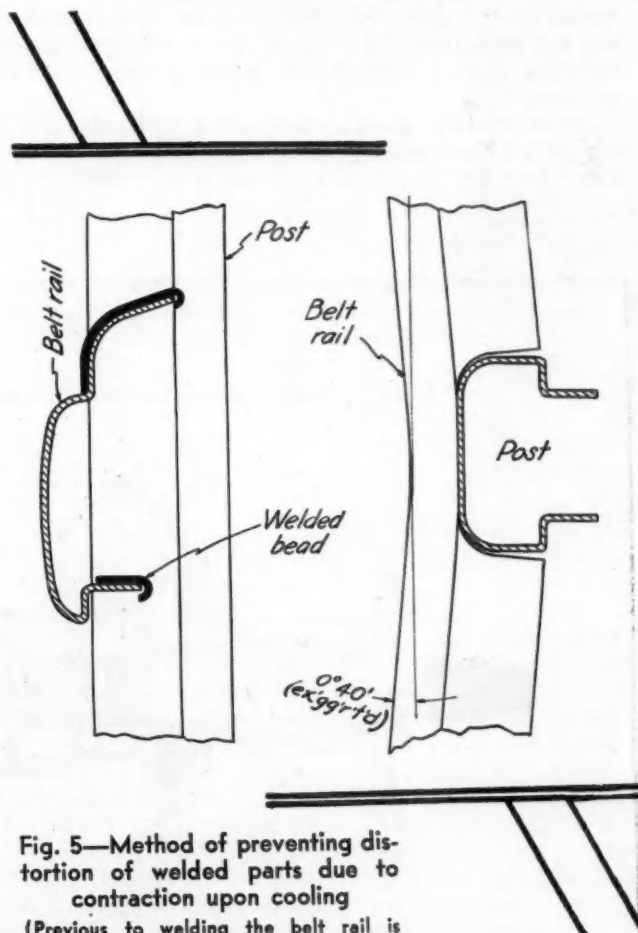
Method of preventing distortion of welded parts due to contraction upon cooling
